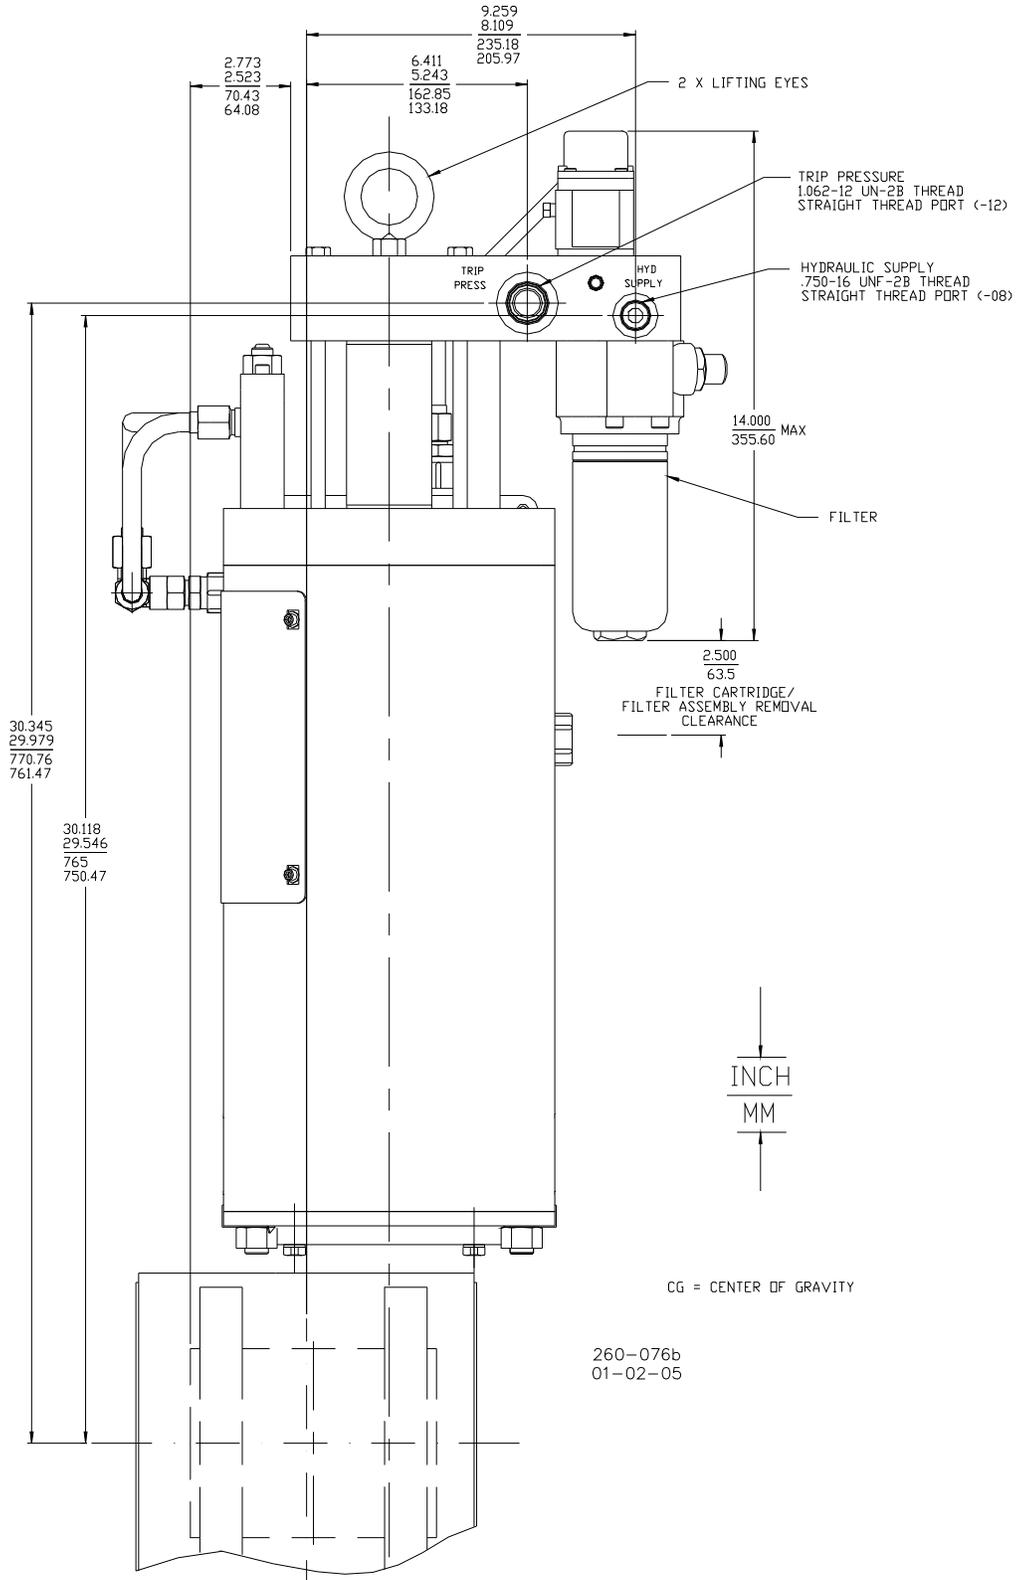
Gas Stop/Ratio Valve Outline Drawing (3-inch) Low Pressure Trip (LPT)
